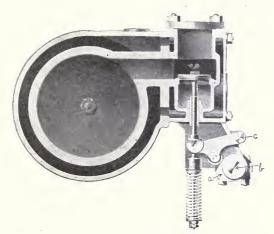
Buffalo Engine. Cross-Section of Cylinder and Valve-Chest. Admission valve is positively actuated.
